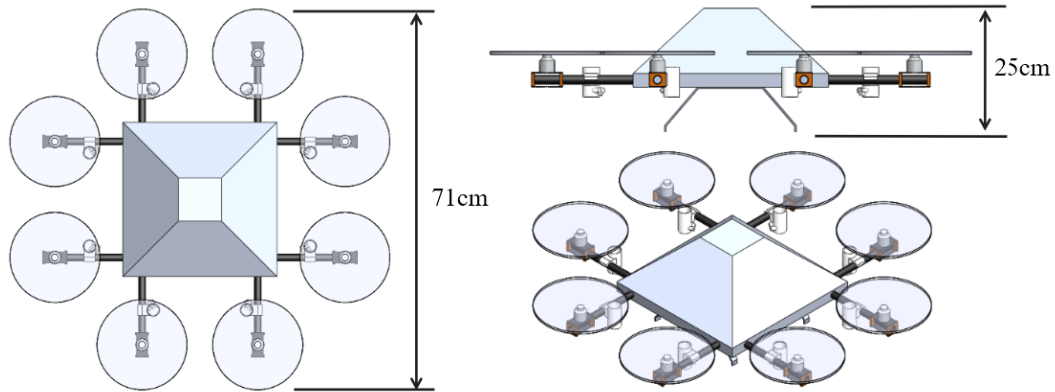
Top view (left), front view (top-right), and isometric view (bottom-right) of the CAD model of the CopterSonde-1 showing the hashtag octocopter layout with dimensions. The symmetric distribution of the weather sensors is visible around the main body as little white tubes below the rotors. Model and images were generated using SolidWorks® from Dassault Systèmes Corporation.
